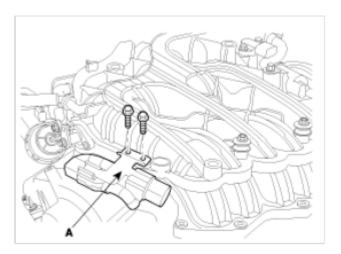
Identifying Surge Tank Connector Bracket With Mounting Bolts
